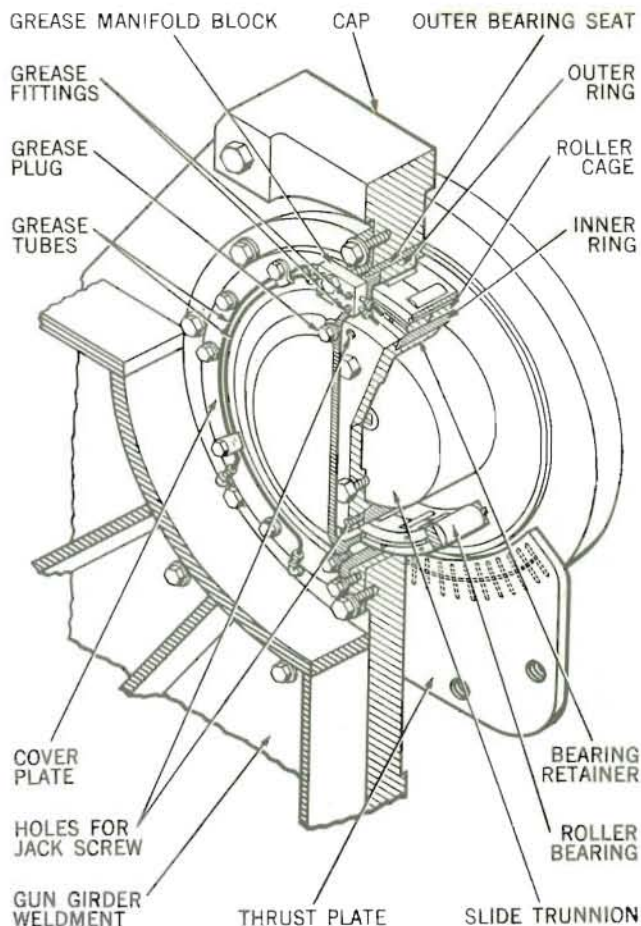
Deck Lug and Trunnion Bearing Assembly, General Arrangement
